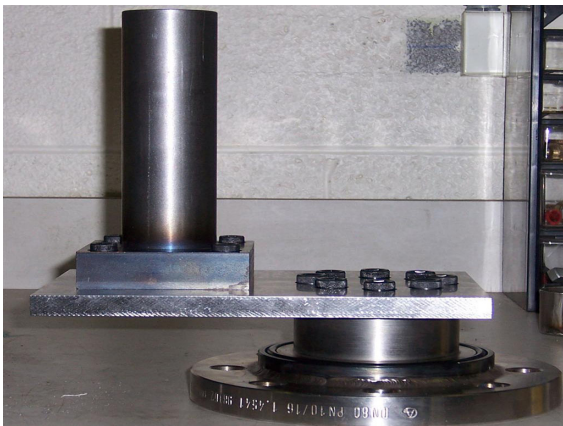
Close-up picture of the old sting which shows the location of the failure point and crack on the front of the weld between the rigid rod and flat plate.
